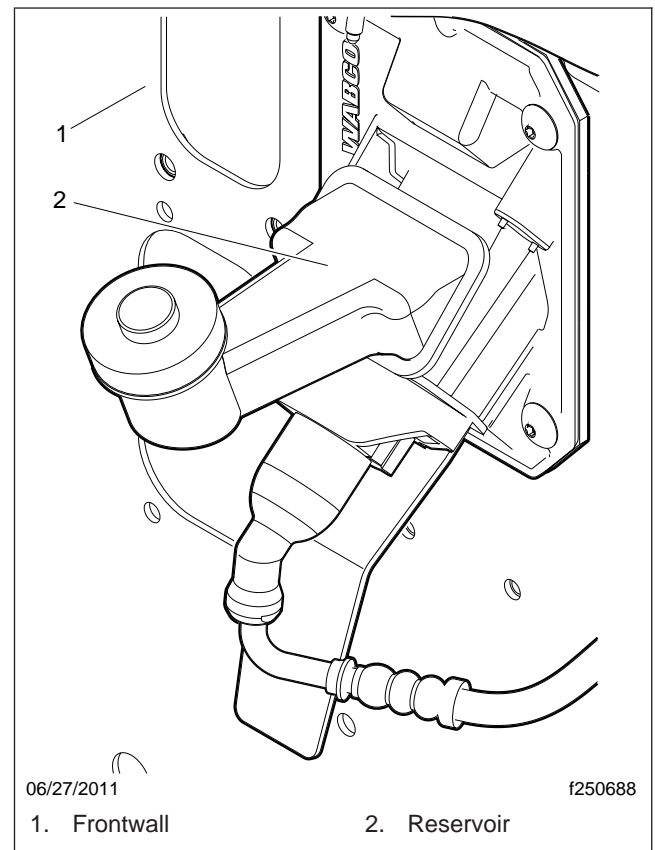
, Master Cylinder, Hydraulic Clutch Control
